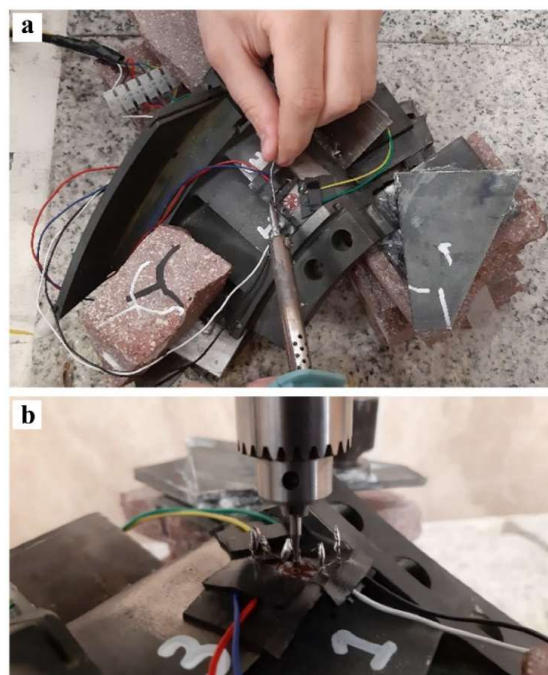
Experimental measurement of residual stresses in the welded nozzle via hole drilling technique (a) establishing the connections between strain gauges and data logger to measure residual stresses, (b) drilling the nozzle sample.
